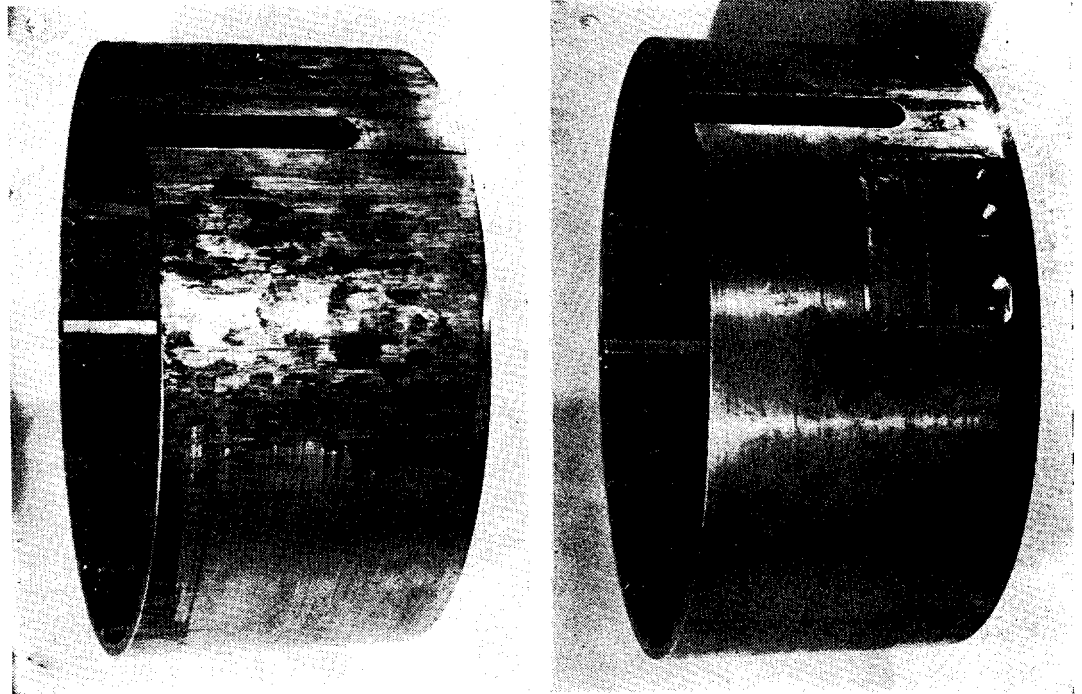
GUIDE PISTONS; LEFT, THE ORIGINAL DESIGN SHOWING SEVERE WEAR AND RIGHT, DESIGN MODIFIED WITH STEAM POCKETS
